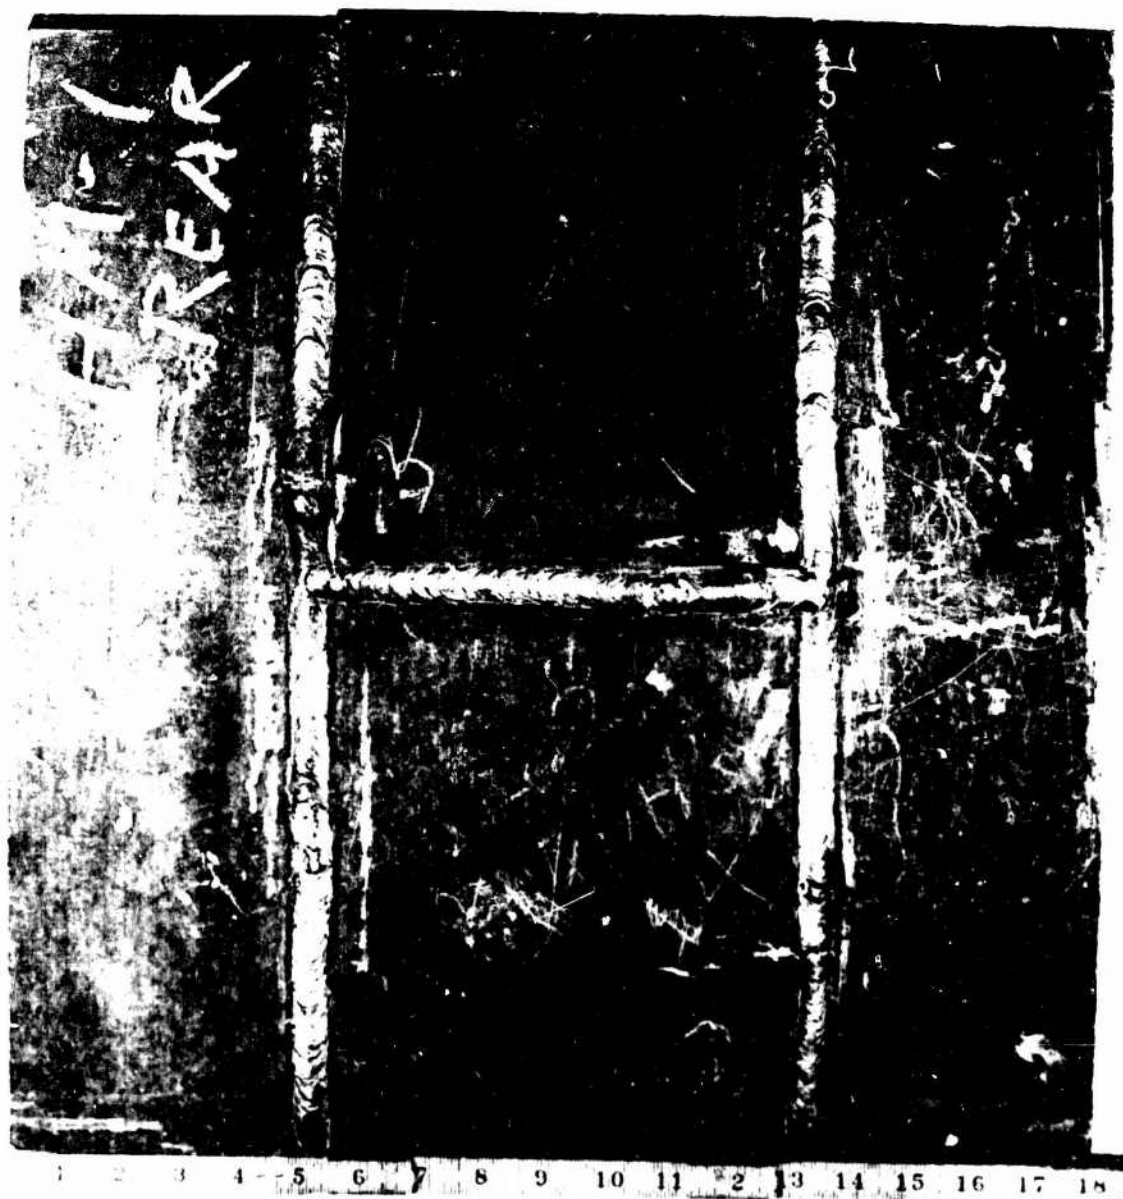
REAR VIEW OF 16 X 16 X 1 INCH M PLATE ARC WELDED WITH ~~XXXXXXXXXX~~ ELECTRODE, AFTER BALLISTIC TESTING, DEC 4 '42 WTN.710-1972
